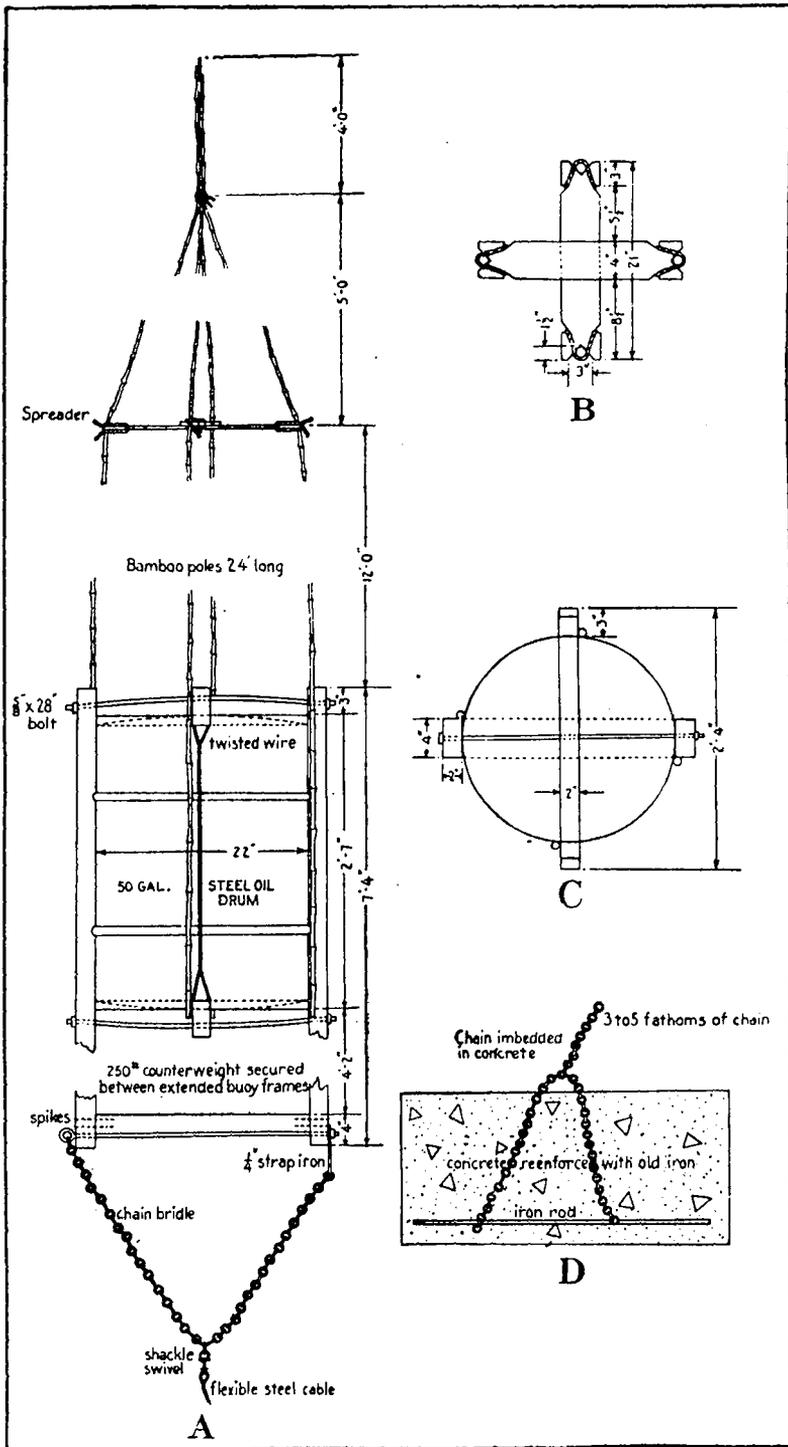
Working drawing of one-barrel buoy signal, second type.
